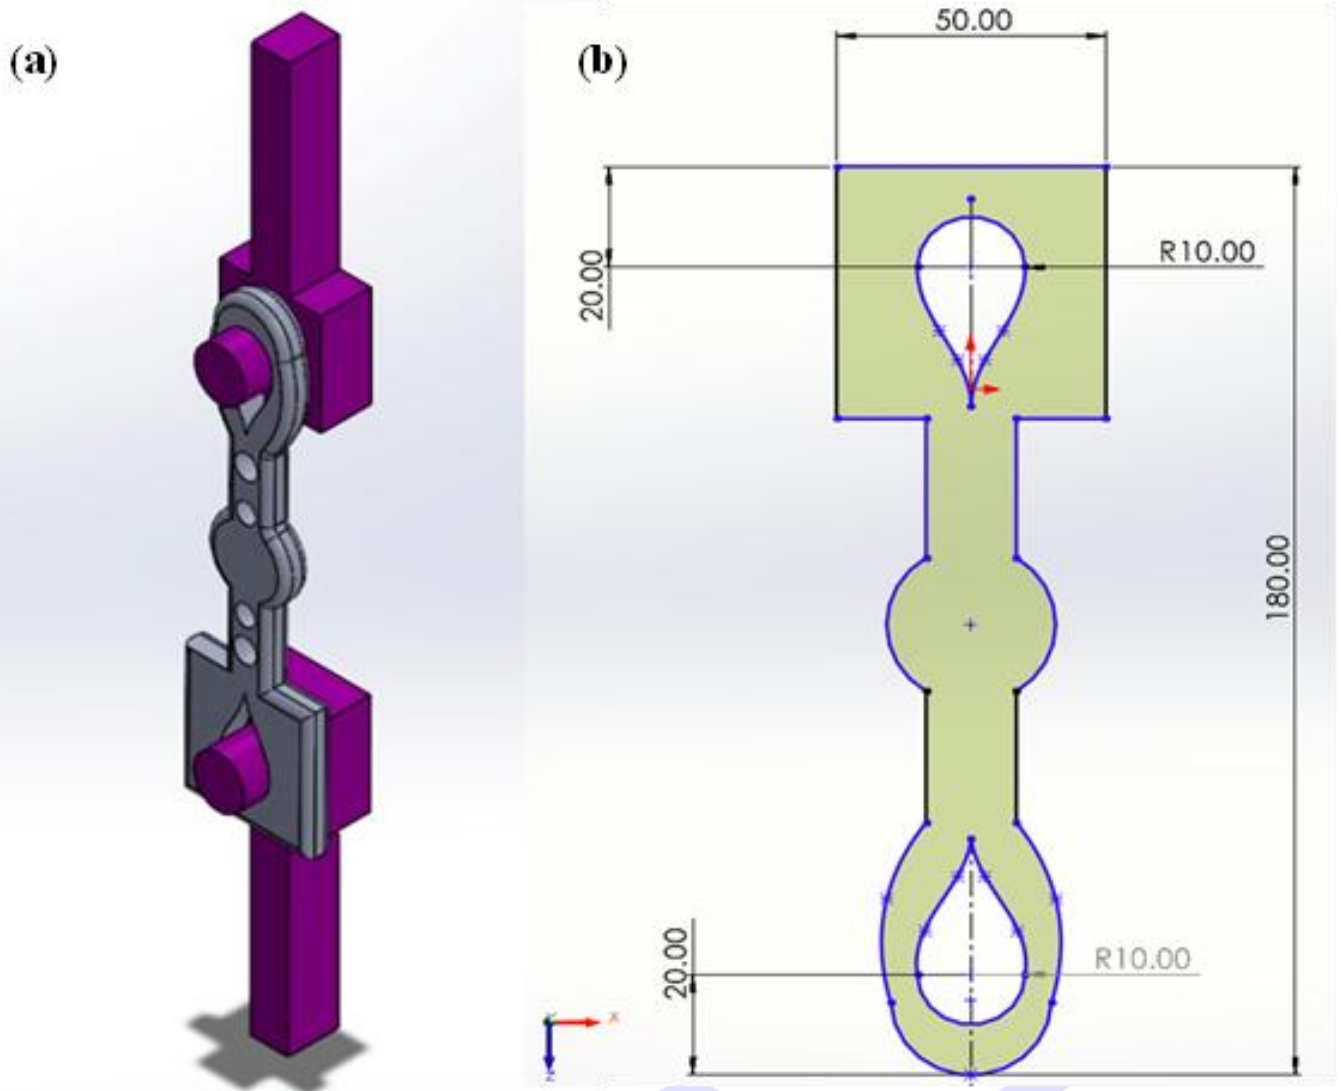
Schematic of (a) metallic fixture of the tensile testing machine and (b) dimension of an acceptable sample.
